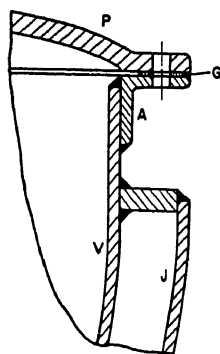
Closure Details and Jacketed Vessel Foundation.
